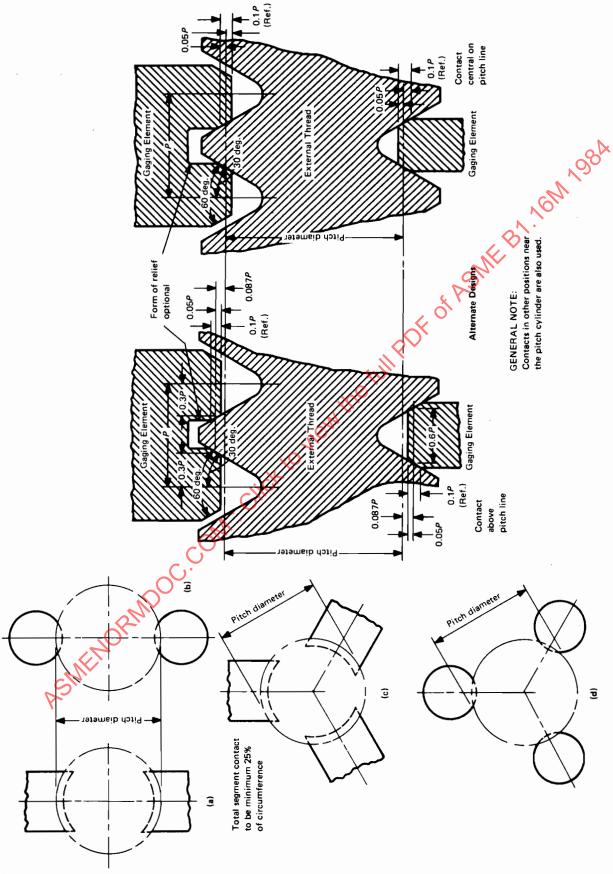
INDICATING THREAD GAGES — MINIMUM-MATERIAL PITCH DIAMETER LIMIT AND SIZE — CONE AND VEE
